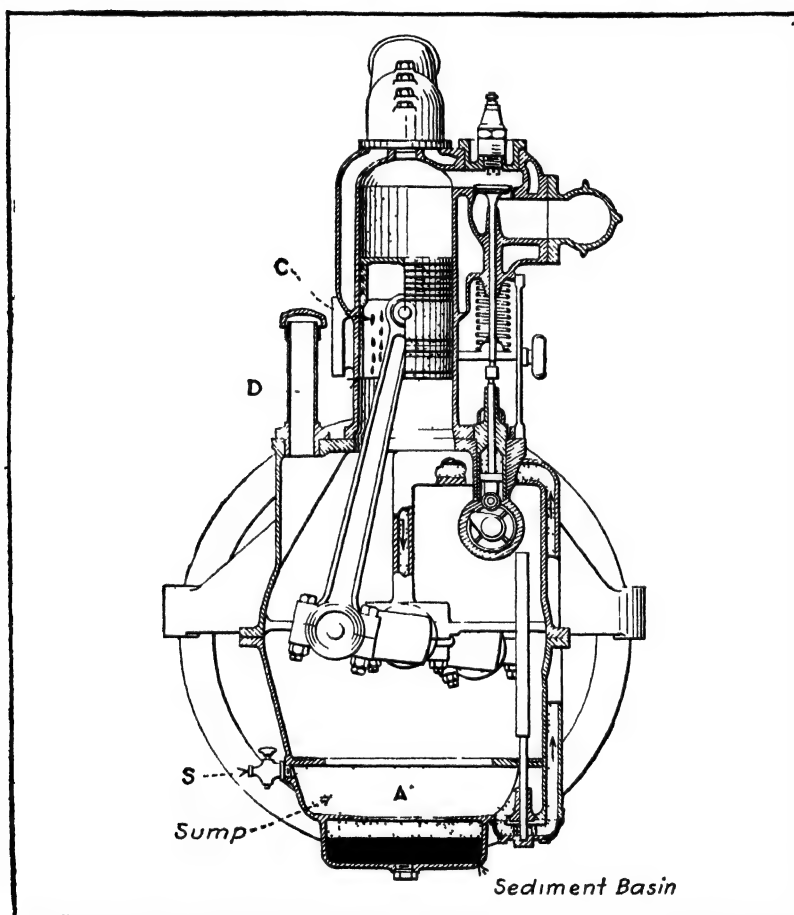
Sectional View of Automobile Engine Showing Method of Preventing Oil Leakage by Piston Rings.
